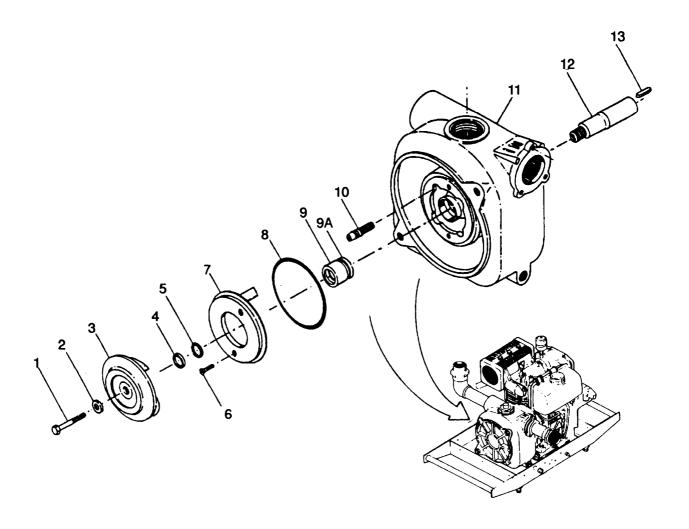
Replacing Impeller, Shaft Seal, and Shaft Adapter NOTE
